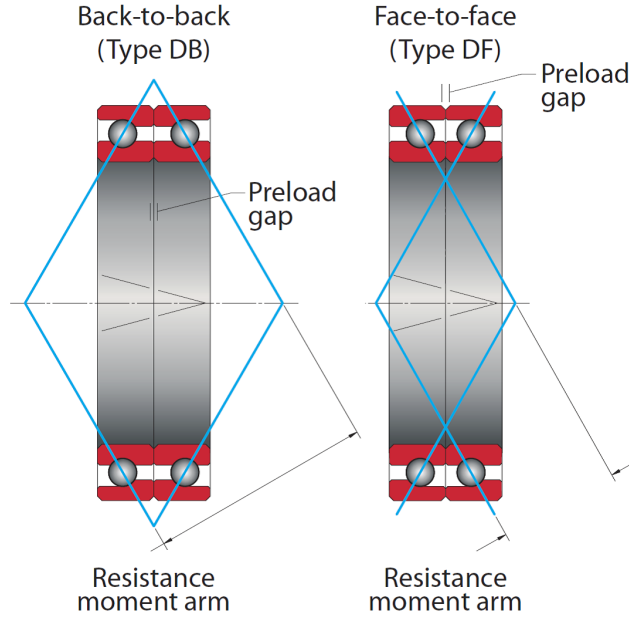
Geometry depicting how angular contact bearings resist rocking moments [17]
